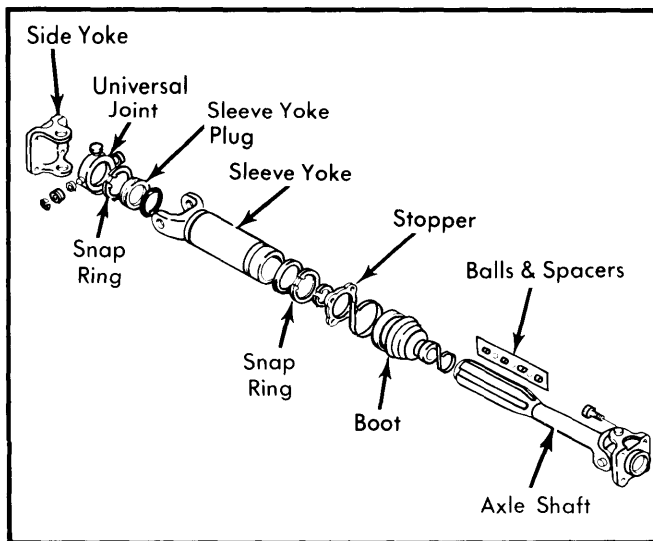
Exploded View of Rear Axle Drive Shaft Assembly (R200 Differential Shown - R180 Similar)
